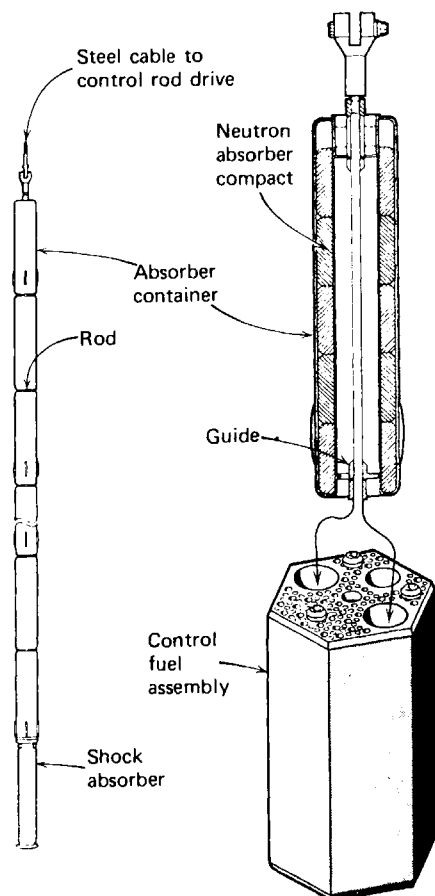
HGTR control rod and control fuel assembly.²¹
